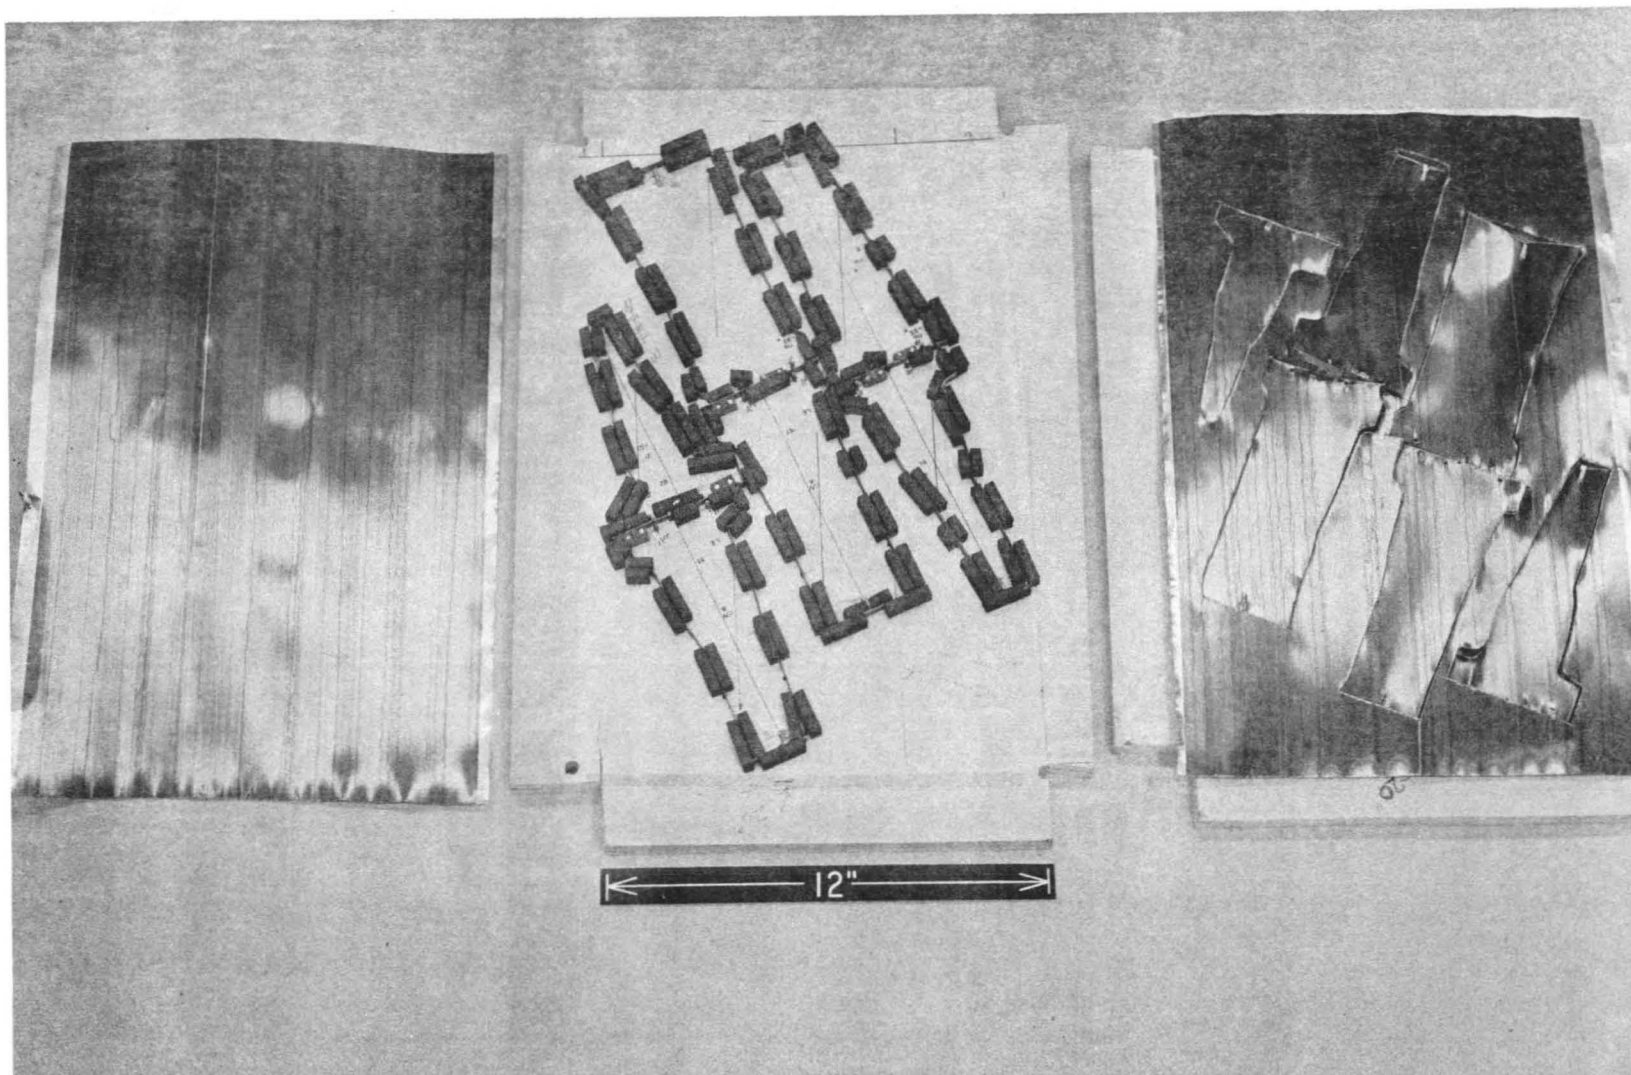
Typical Steel Rule Clicker Dies, Center, Used to Punch Out the B/A1 Ply Patterns.
